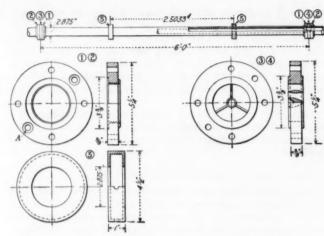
Flanges, Piezometer Rings, and Test-Pipe Assembly
